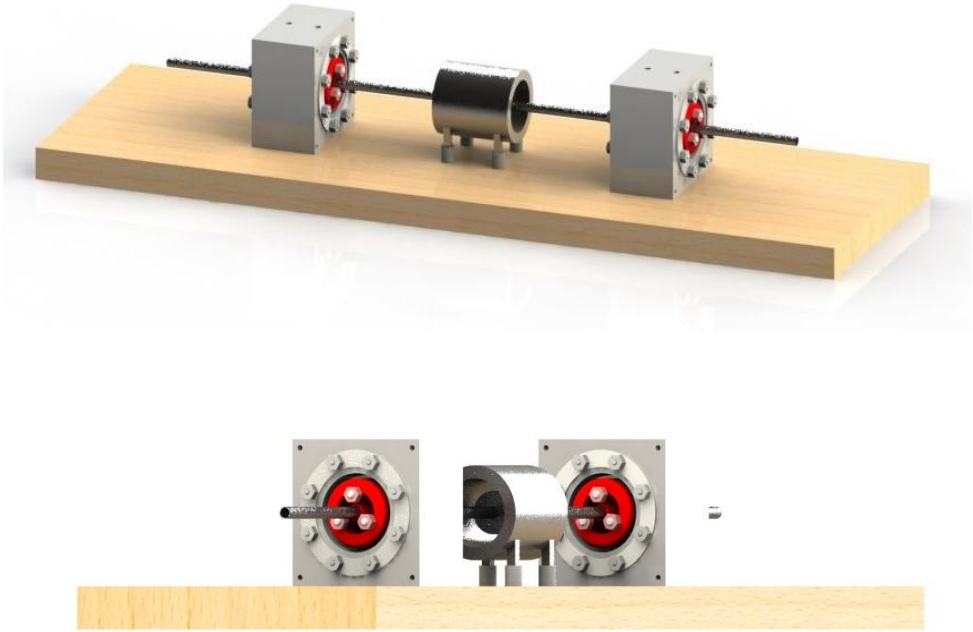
SMB replacing both mechanical bearings from a electrical machine.
